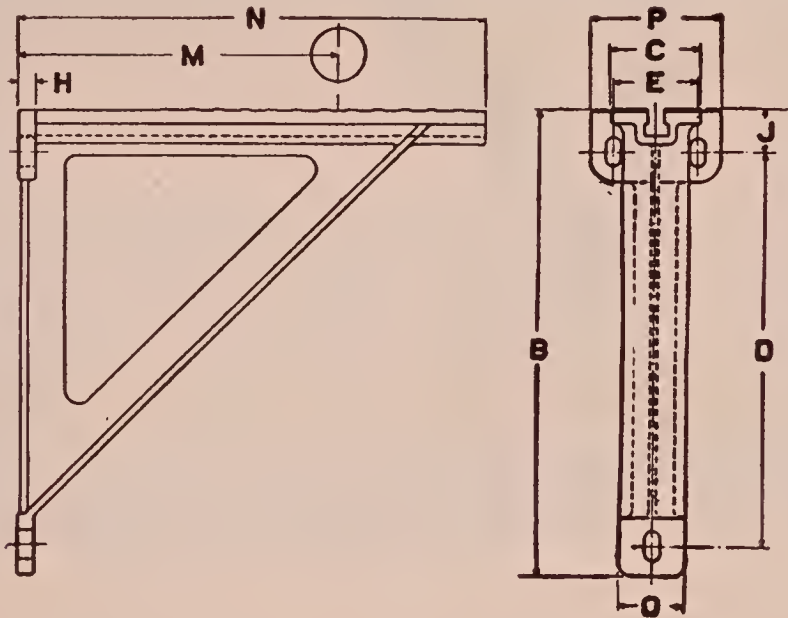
A mechanical drawing (not a working drawing) of a wall hanger.
